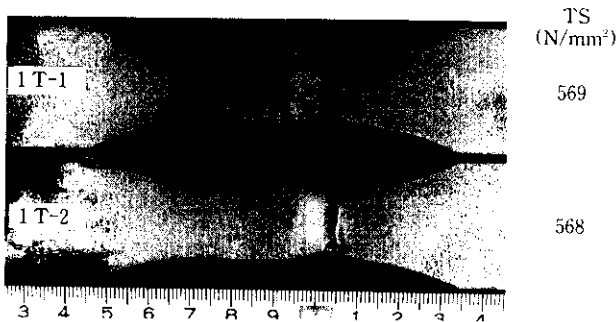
Tensile test results of welded joint (Location of rupture: pipe body)
